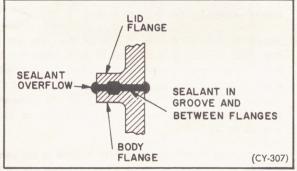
Model SA-\*VI Cross Section of Sealed Flanges on Cast Iron Housing
